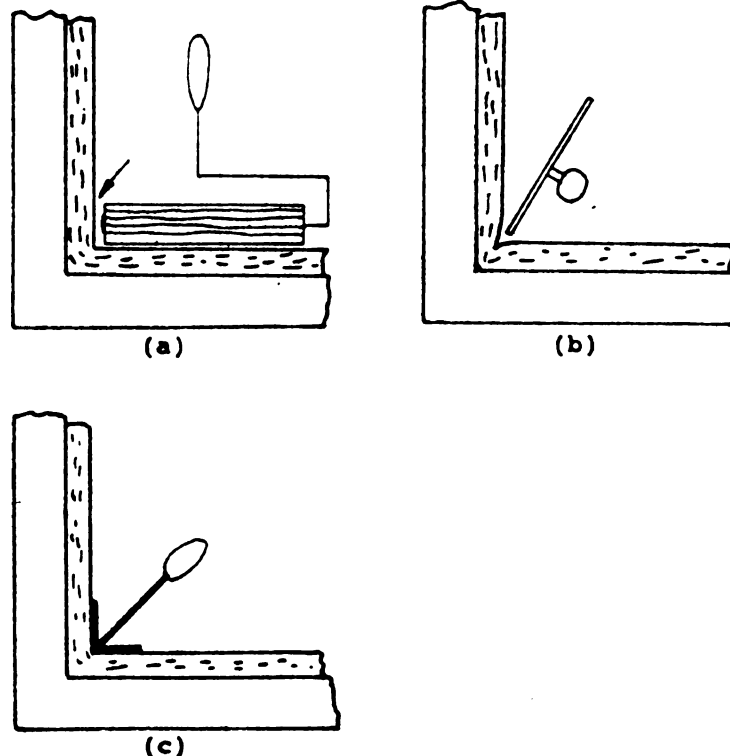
Moulding Technique for Internal Corners (Reference 14).
